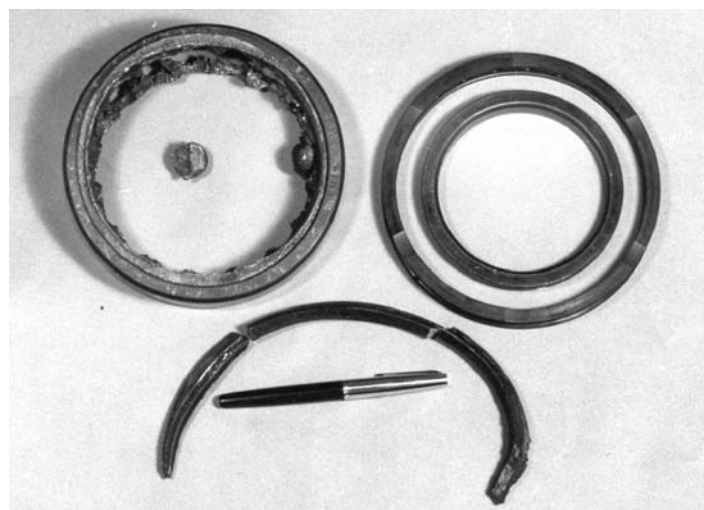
Severely damaged bearing parts. Note the broken inner ring and the severely rubbed ball bearing.
